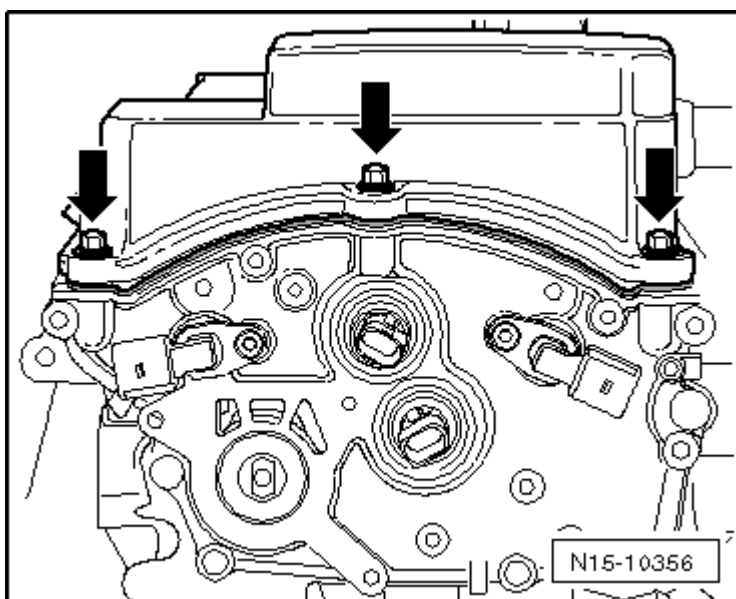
Identifying Three Cylinder Head Cover Bolts
